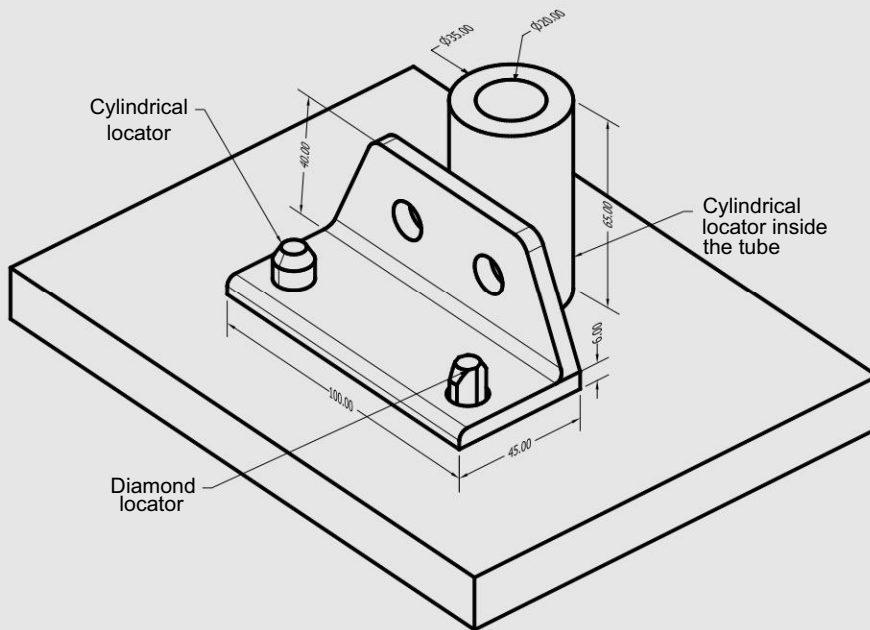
shows all the components along with the parts that are to be welded in the rightful place. Notice that there is no clamping arrangement provided in the fixture.
